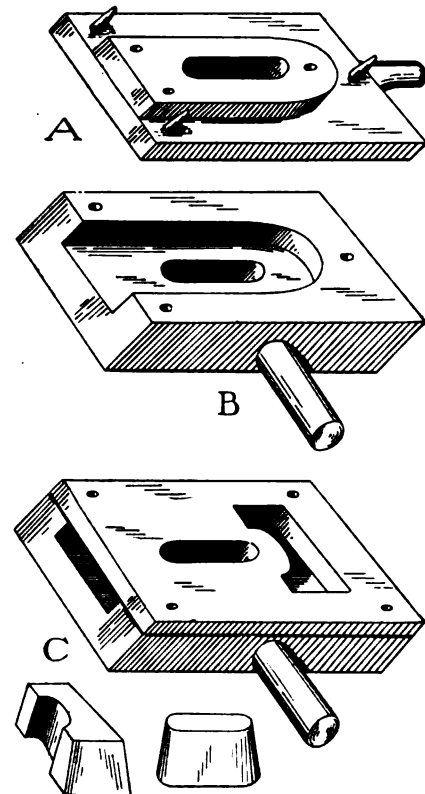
TOOLS FOR SHEARING THE ENDS AND PUNCHING KEYHOLES IN SPRING HANGERS.
